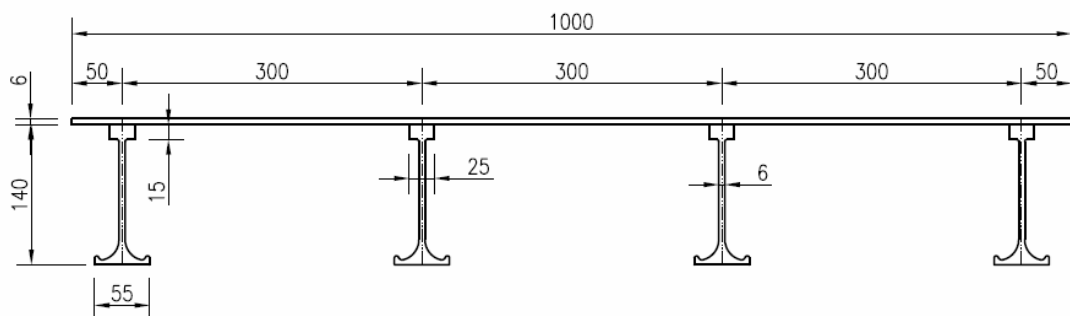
(e) Layout of test structure 20D1 for friction stir lap-joining in mm
